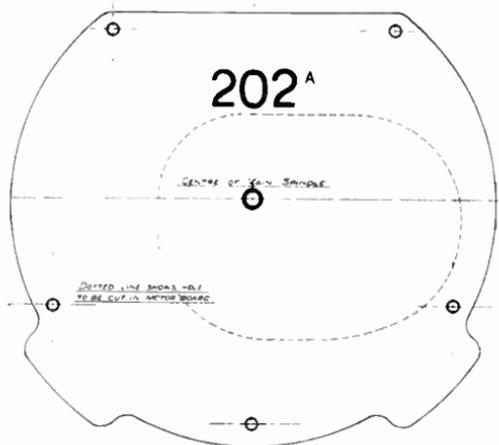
SHOWING TEMPLATE FOR FITTING GARRARD NO. 202 GRAMOPHONE MOTOR. See Fig. 6. for details of use.
